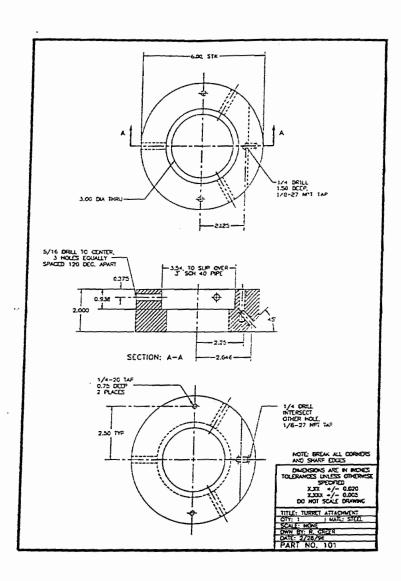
Turret Attachment Drawings -Manufactured by the Automated
